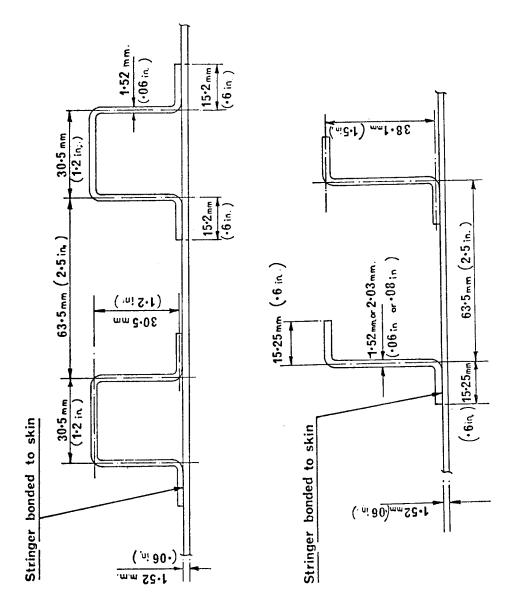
Cross-sectional geometry of hat- and Z-section panels.
